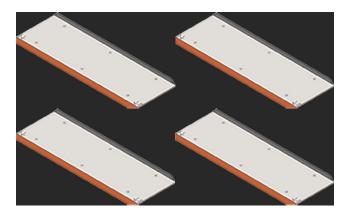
g V-2412-K End Seal Kit for 4" Panel Holders
